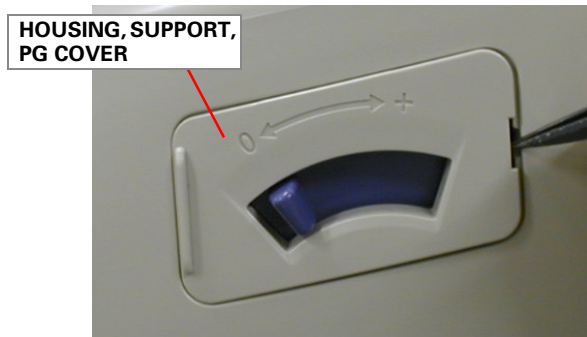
HOUSING, SUPPORT, PG COVER Removal
